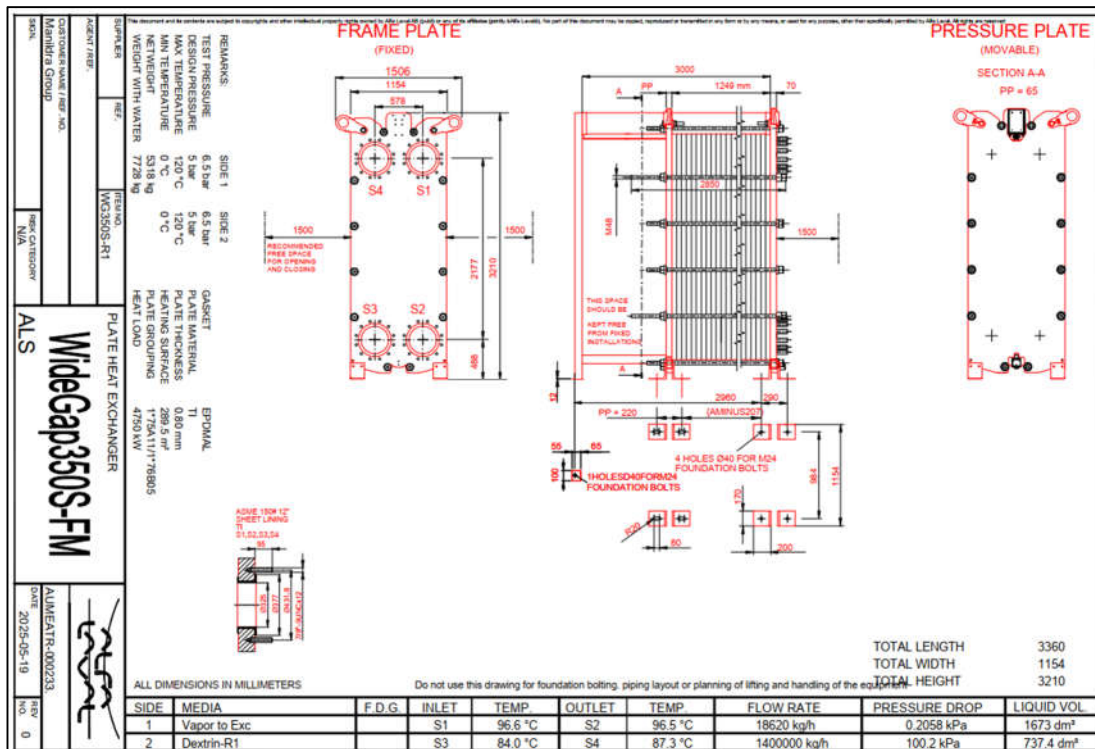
Plant Heat Exchanger Drawing – Source: Shoalhaven Starches
